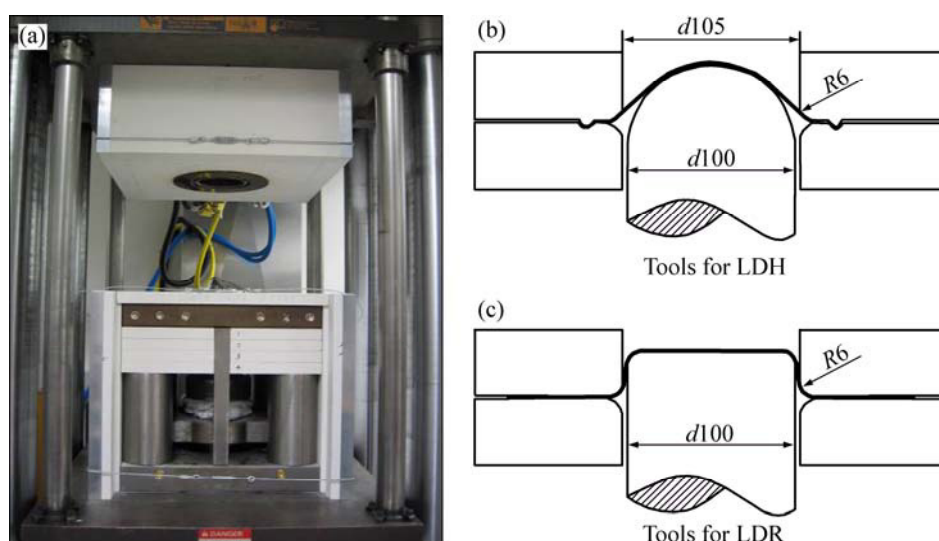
Equipment for warm forming formability test: (a) Pictures of formability system (with some of front insulation removed); (b) Tool geometries used in LDH tests; (c) Tool geometries used in LDR test
